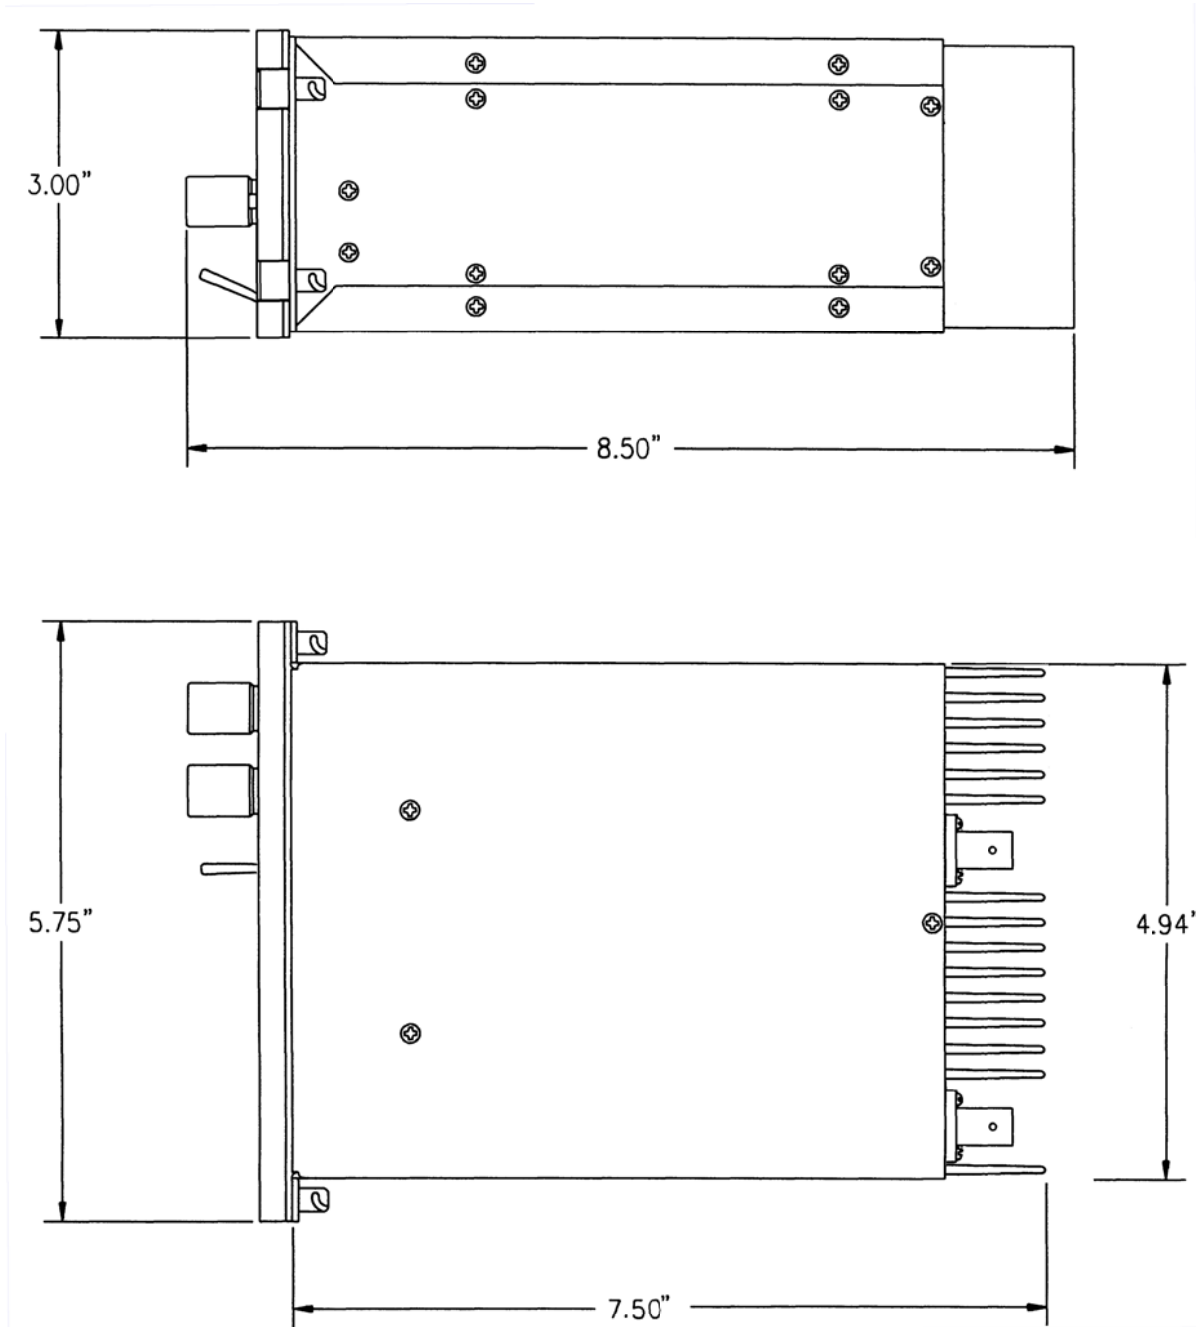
Outline Drawing for TDFM-136B Transceiver
